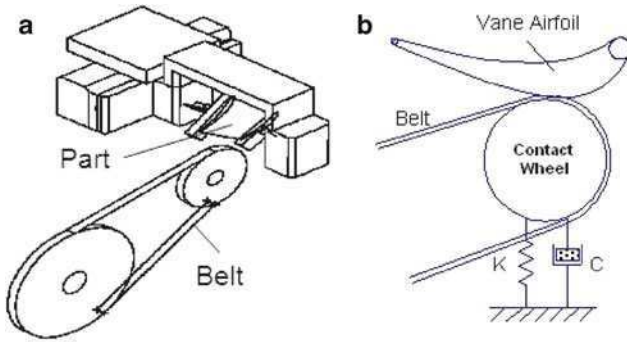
(a) Part gripper and (b) polishing head with passive force control [16]
